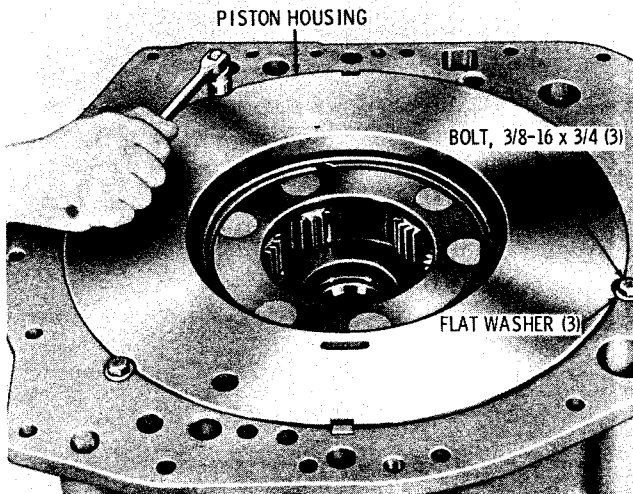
Installing forward clutch piston housing bolts (5630 models)
